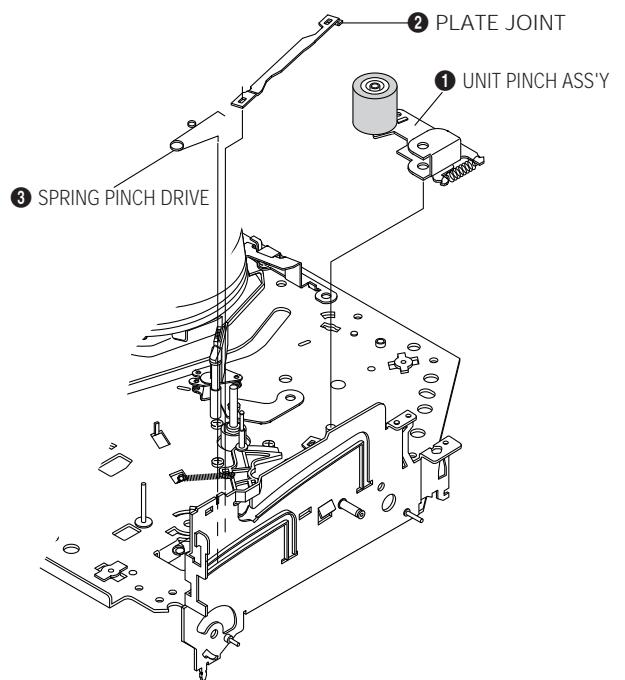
Unit Pinch Ass'y, Plate Joint, Spring Pinch Drive Removal
